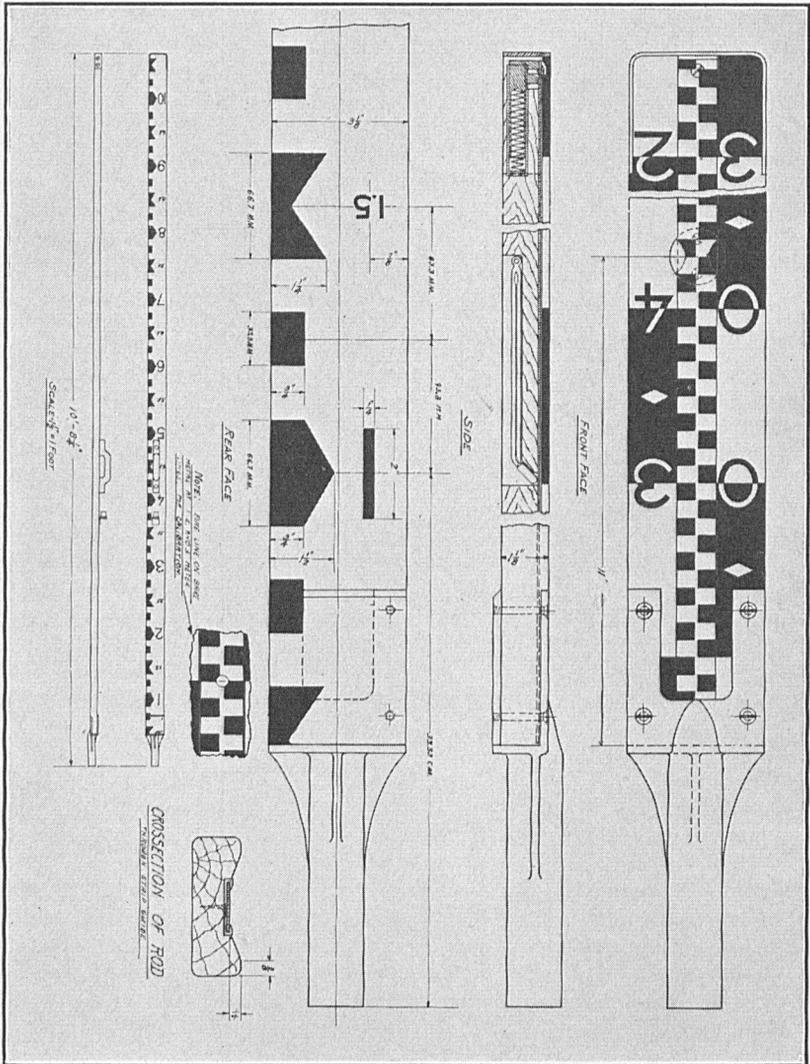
Leveling rod, details of back, front, and cross section.
